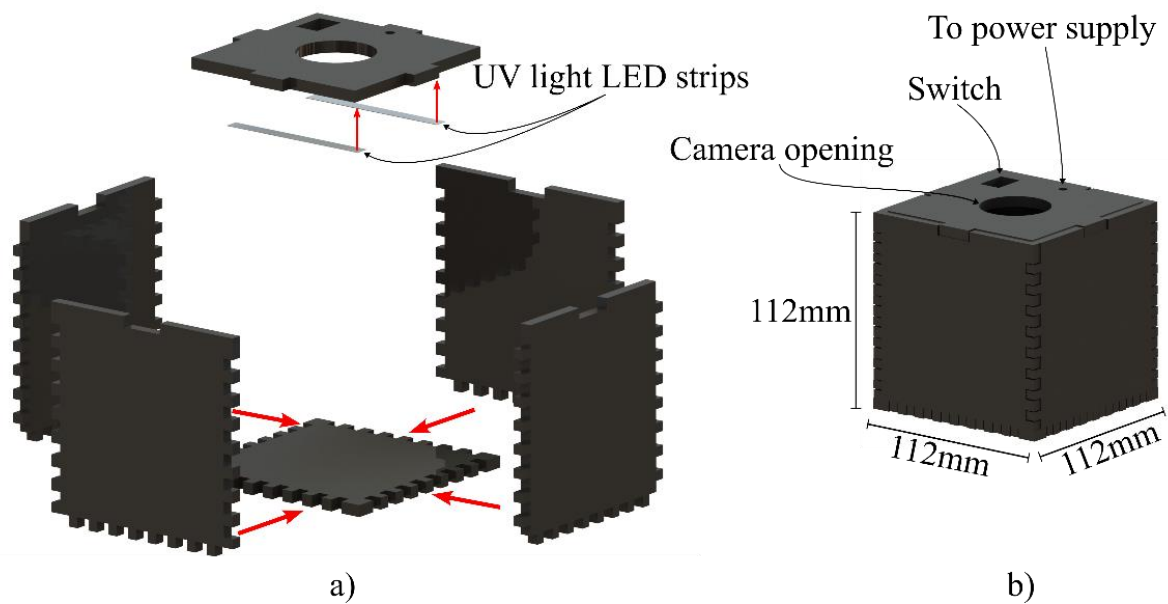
3D Design and assembly of the UV light black chamber (a) individual parts and assembly process and (b) assembled black chamber illustrating its overall dimensions and functionalities.
